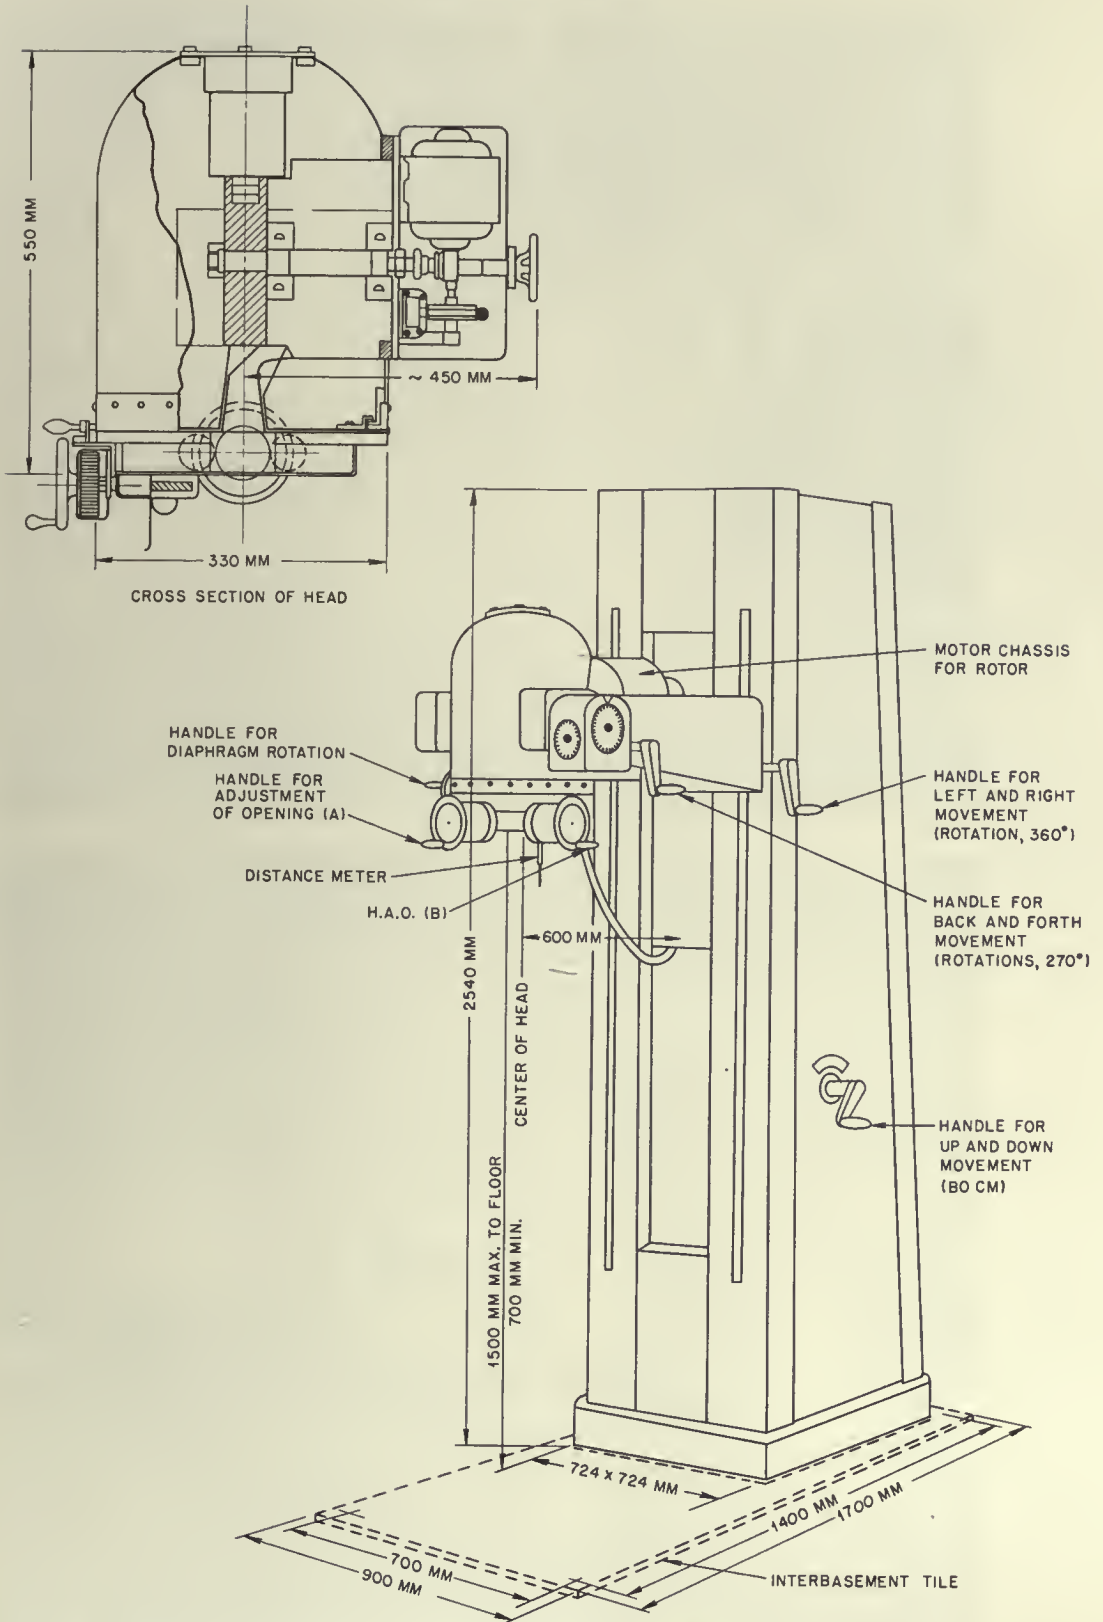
Sketch of the inside view of the head of the 100-curie Co^{60} machine shown in Figs. 1 and 2.
